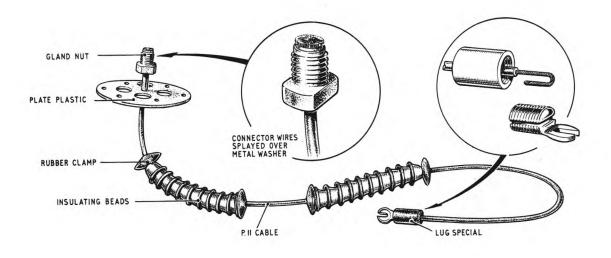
MAKING THE HF AERIAL CONNECTOR
